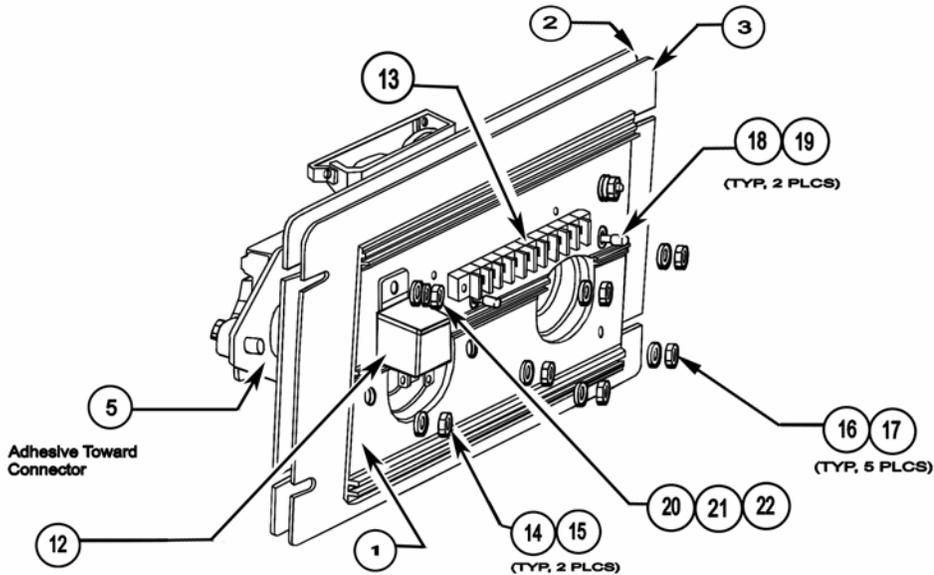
0N10-1037-00 Module Face Plate Sub-Assembly, Back Side
